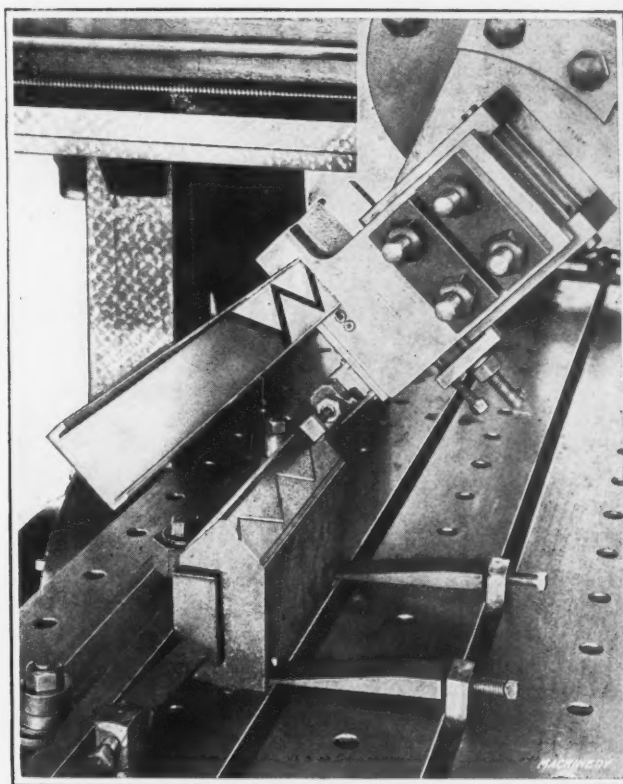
Hanson-Whitney Oil-grooving Attachment for Planers, cutting Oil-grooves in a Male V-bearing
